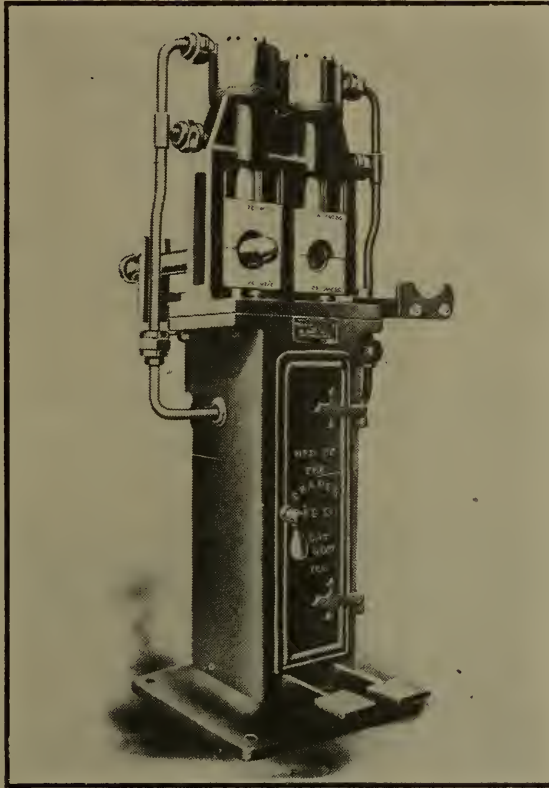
Pneumatic machine for welding and swedging superheater tubes.
